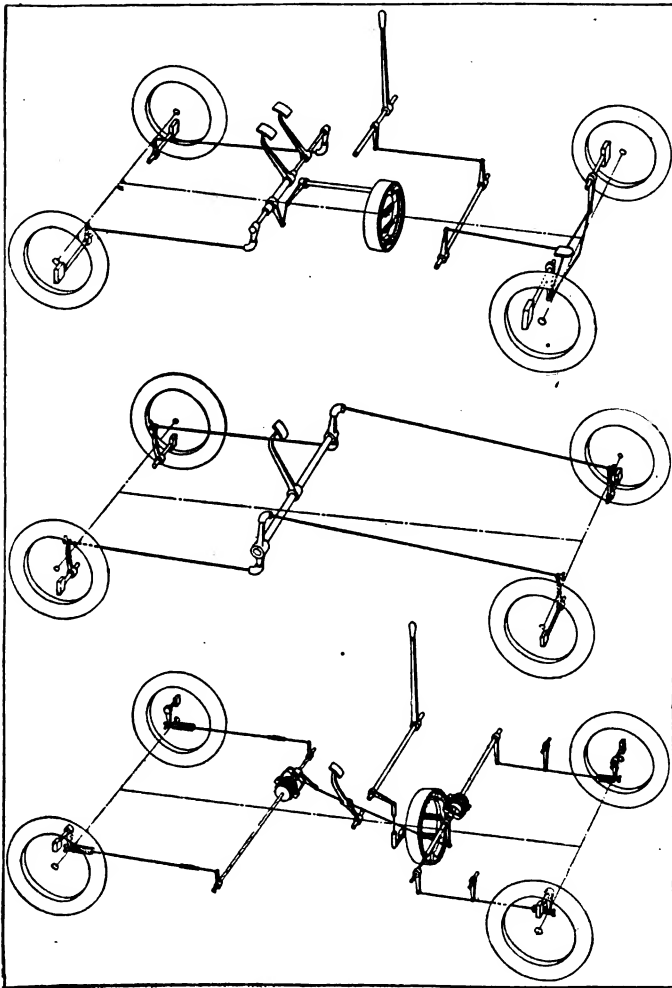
BRAKE CONNECTION LAYOUT (READING FROM THE TOP DOWN) ON THE BELLANGER, EXCELSIOR AND DELAGE CARS
